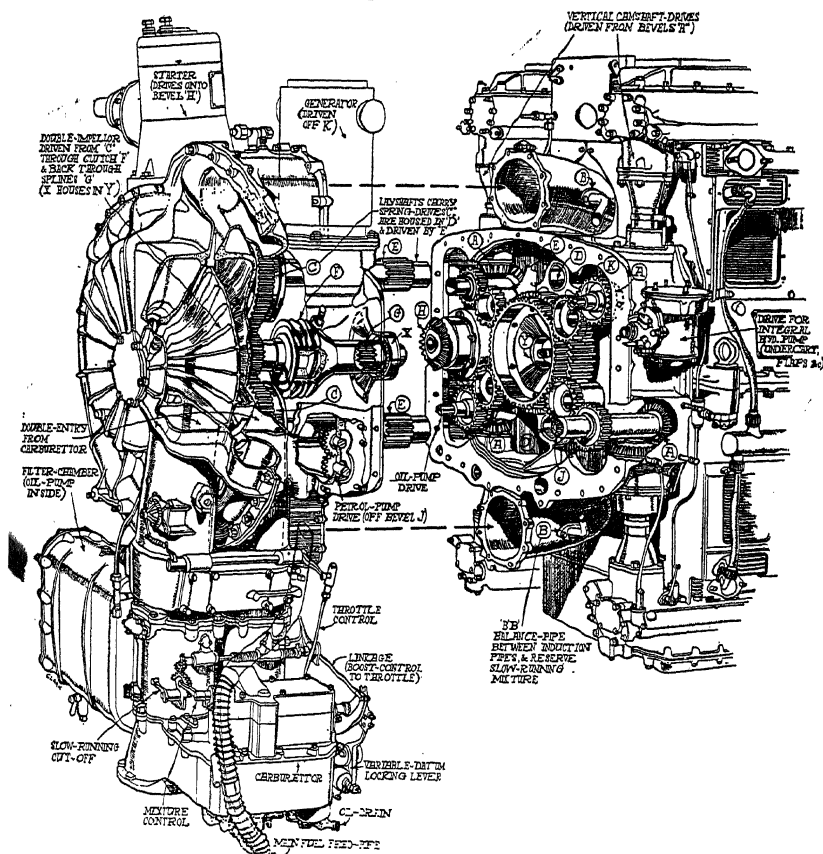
Details of supercharger and other engine drive units, etc. Napier "Dagger VIII" engine. (Courtesy "The Aeroplane.")
